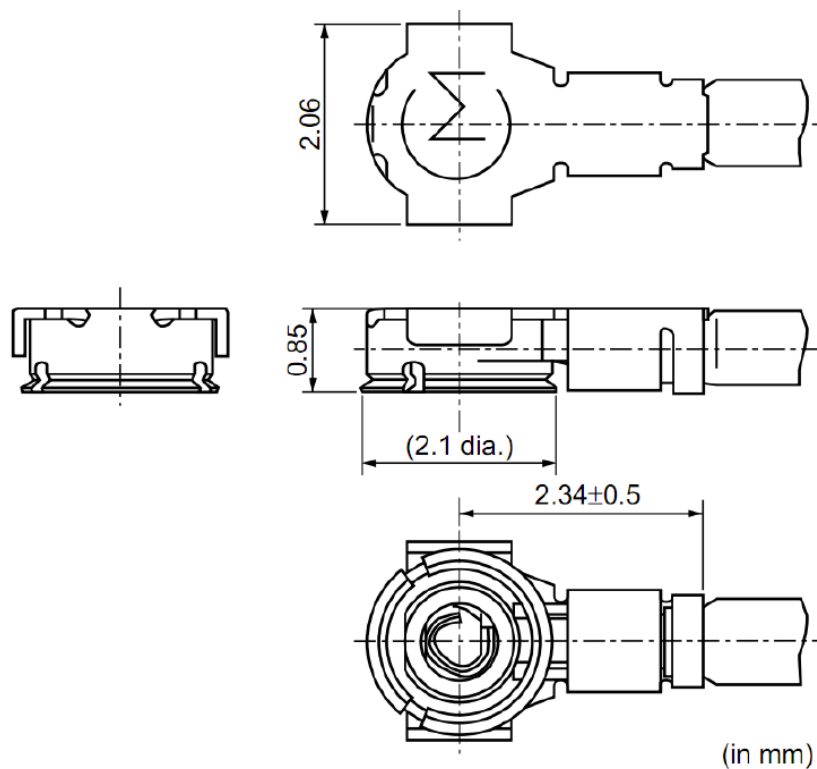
Specifications of Mating Plugs with \varnothing 0.81 mm Coaxial Cables
